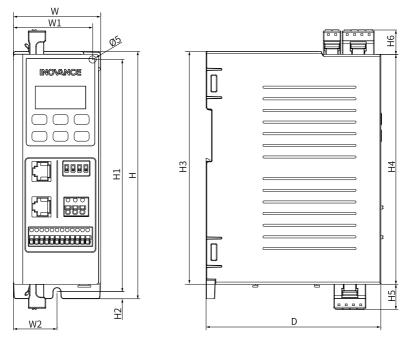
Outline dimensions and mounting dimensions of T1 to T2 models
